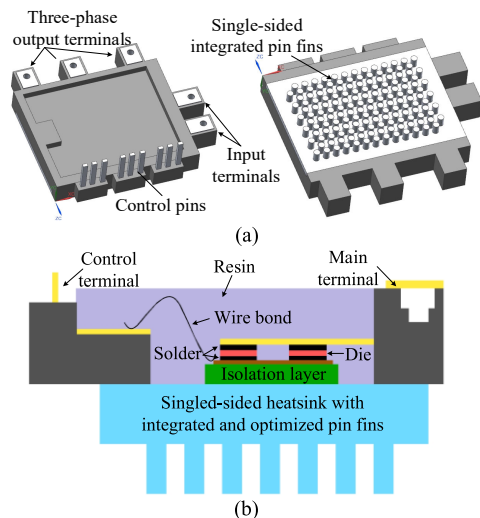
Mitsubishi J1-series power module: (a) CAD model (top and bottom views). (b) Internal cross-section [12].
